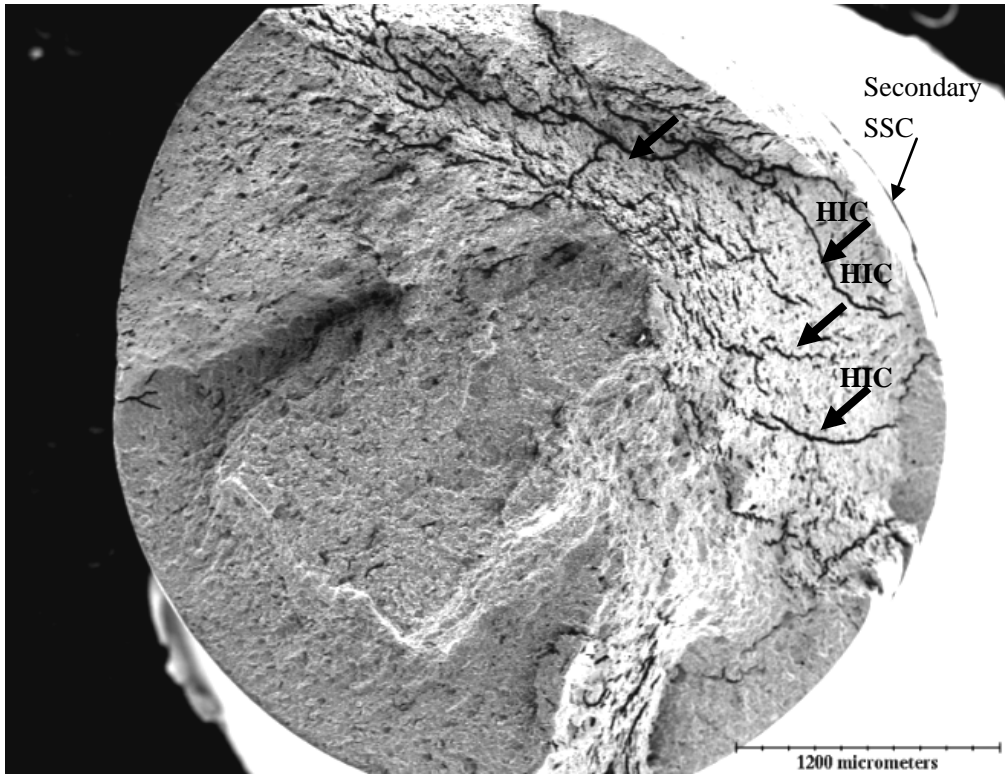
ERW L80-MnCr fracture surface.
